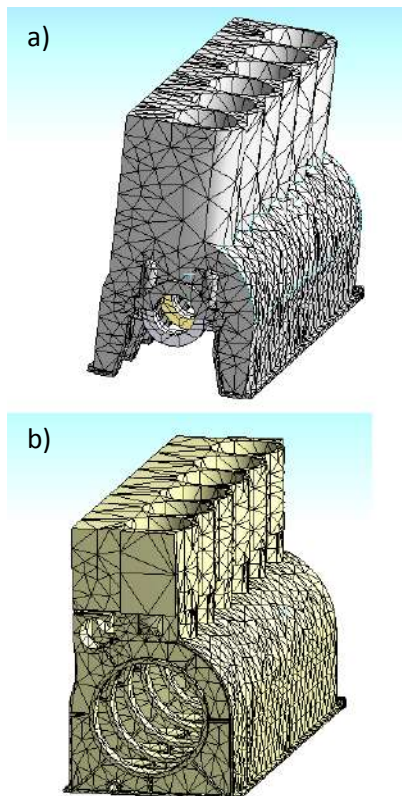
Model of the crankcase of the 6-cylinder engine of design No 2 (a) and design No 1 (b)
